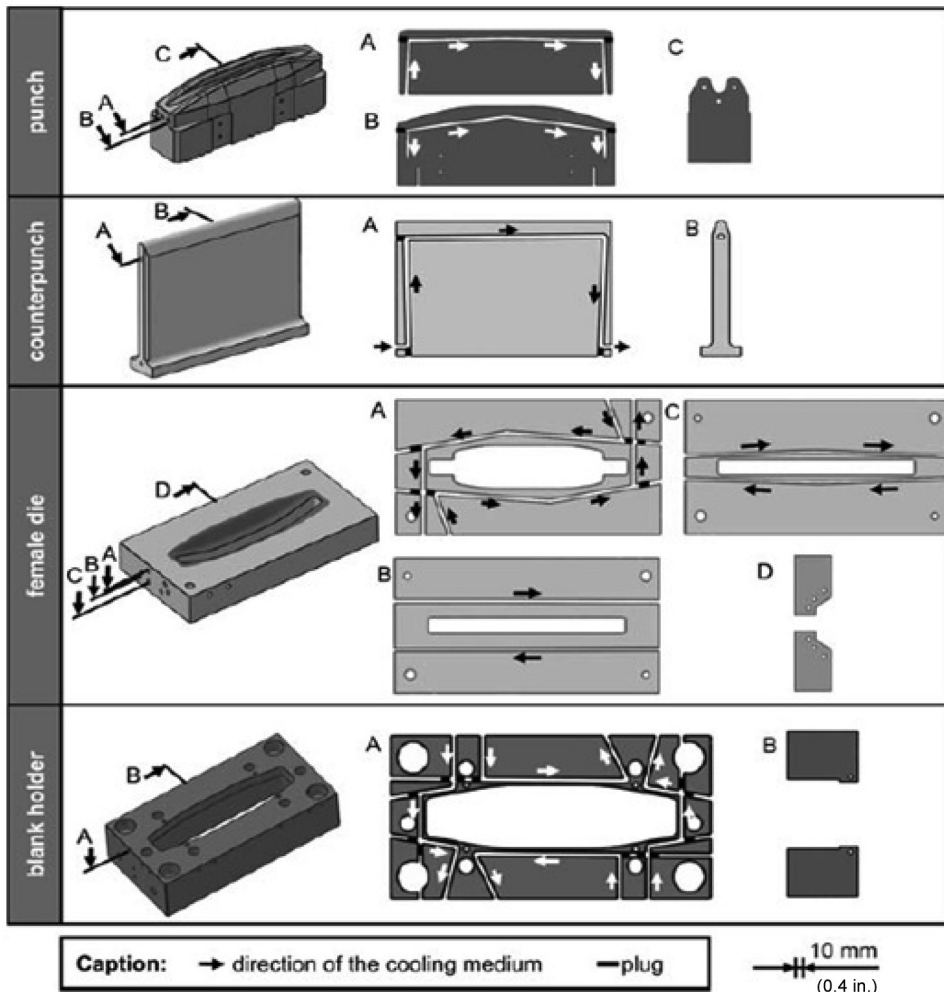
Optimized design of the cooling ducts for the tool components punch, female die, counterpunch, and counterblank holder. Source: Ref 7.33
